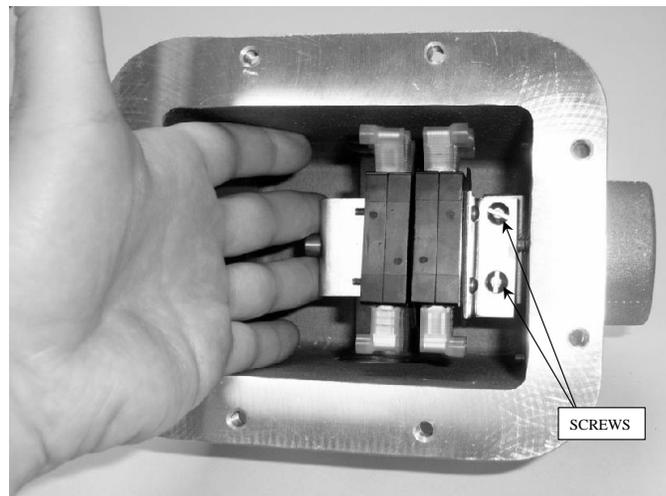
While holding spring retainer, replace screw to hold retainer in place. The spring retainer may be removed for access to the ground screws.
